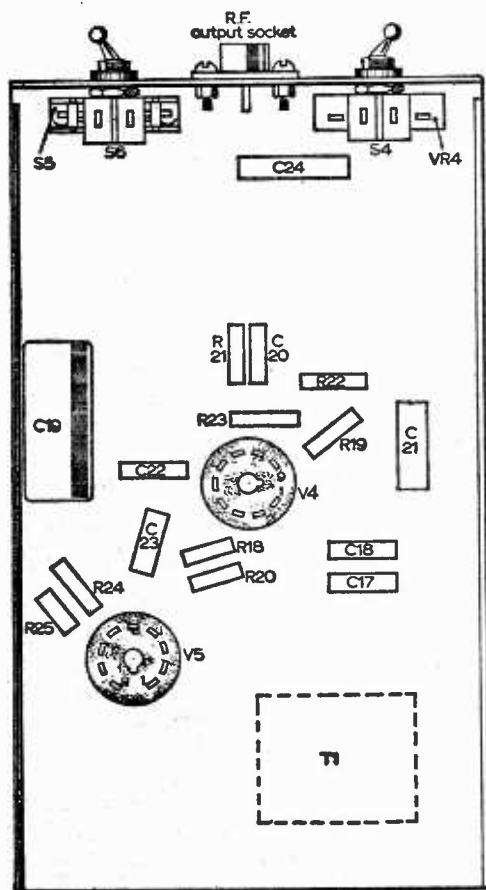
An underchassis view of the r.f. unit. Dimensions for this chassis are 7in. x 4in. with a 2½in. front panel and ¾in. flanges.
